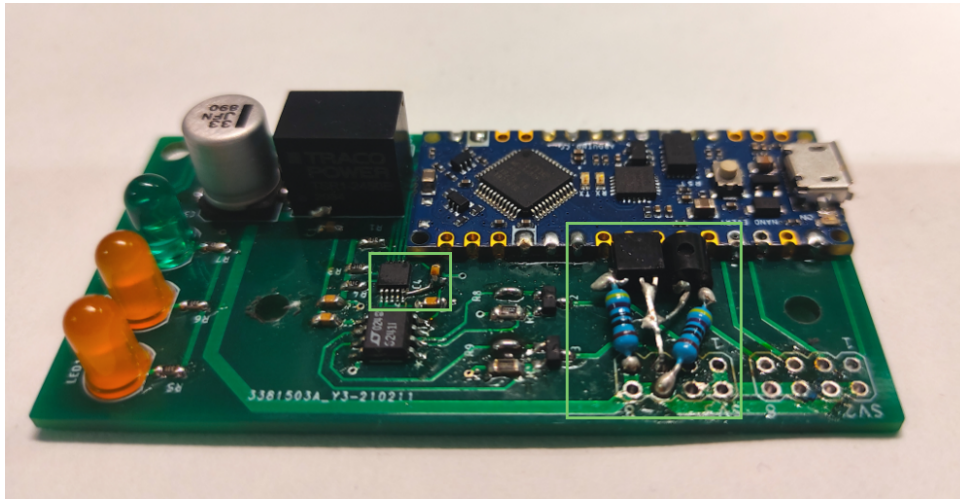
Soldered PCB with additional changes to fix design issues.
